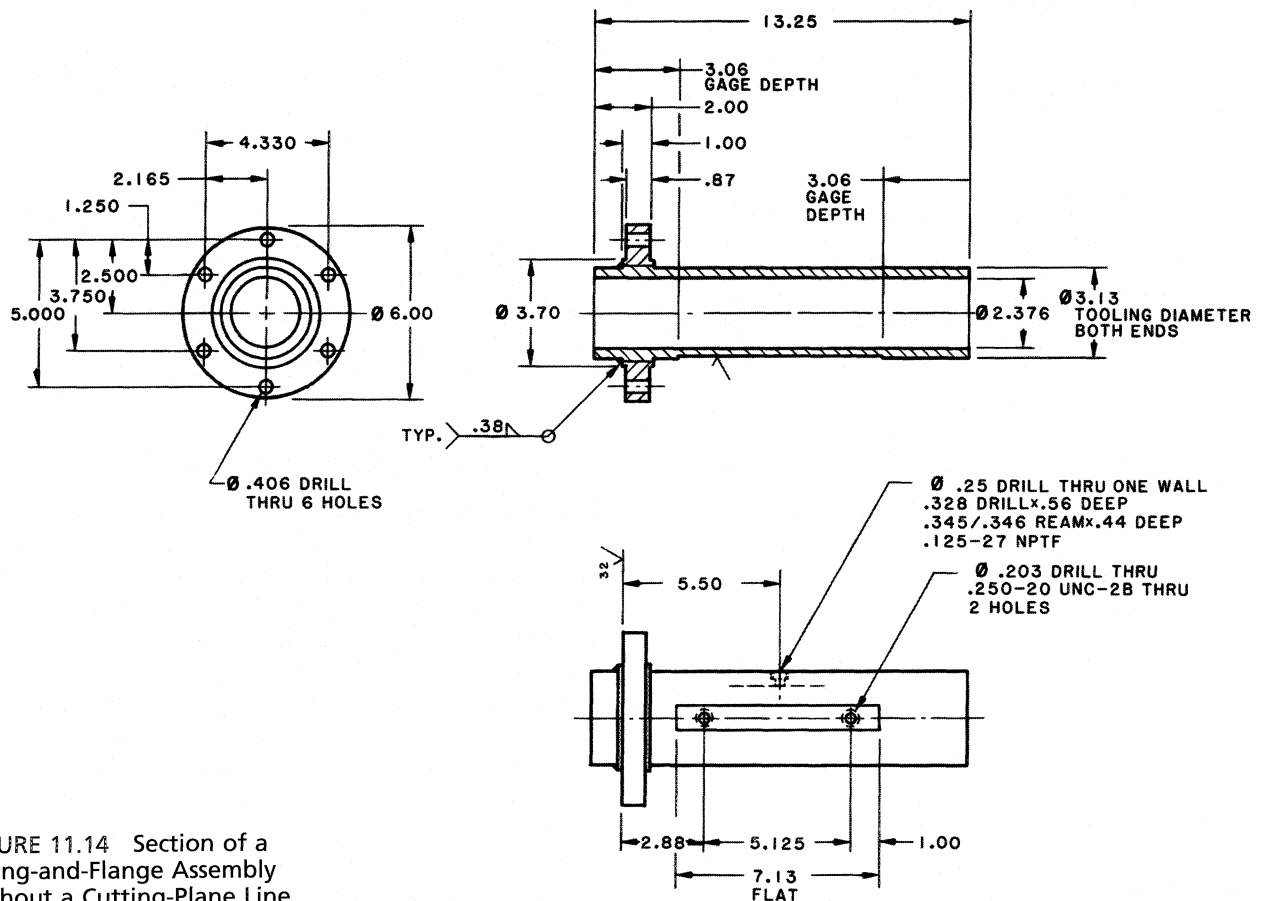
Section of a Piping-and-Flange Assembly Without a Cutting-Plane Line
